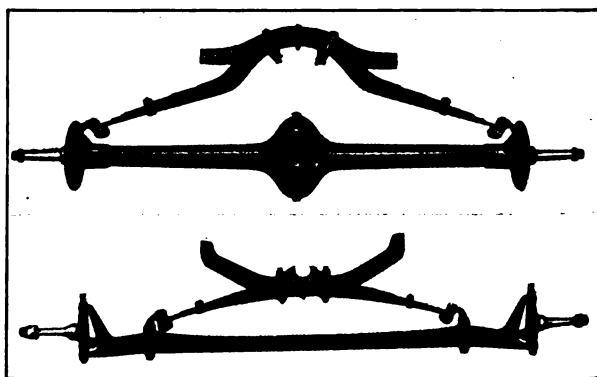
Front and Rear Spring Assembly—The Lower View Shows Cones and Adjusting Parts of Ball Bearings.
